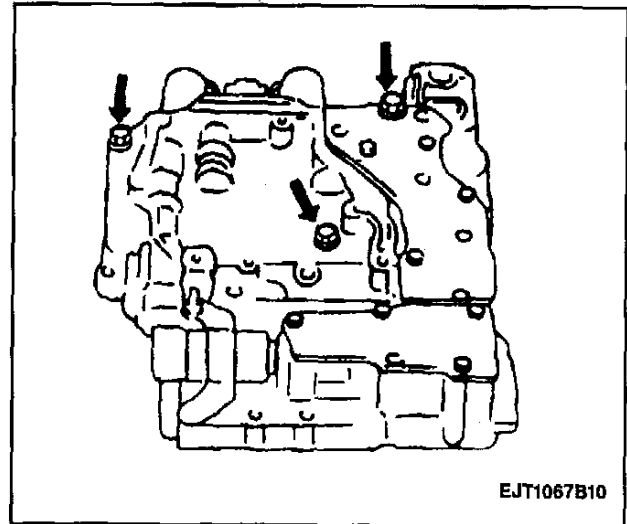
Lower Valve Body Bolt Location (03-72LE, 4-Speed)
